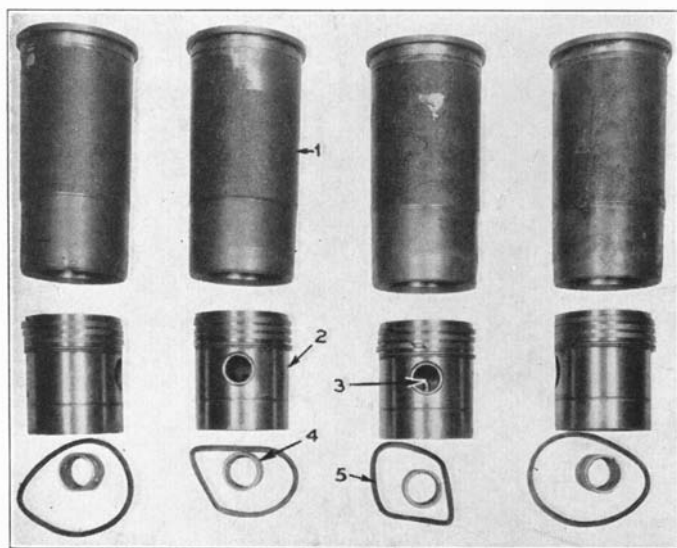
Set of replaceable cylinder sleeves or liners with pistons fitted to sleeves
